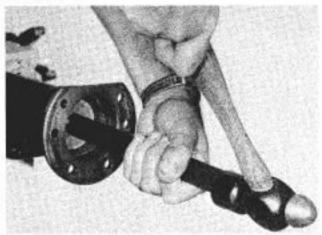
Assemble new greese: seal into bousing. Tools: #C-4026A Seal Installer, #C-4171 Handle. After seal has been assembled, grease lip of seal.
